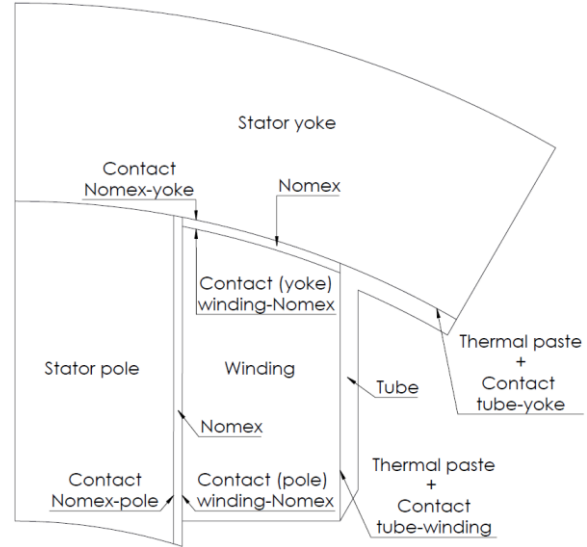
Sectional drawing of half of the experimental setup (test section) with the components indicated.
